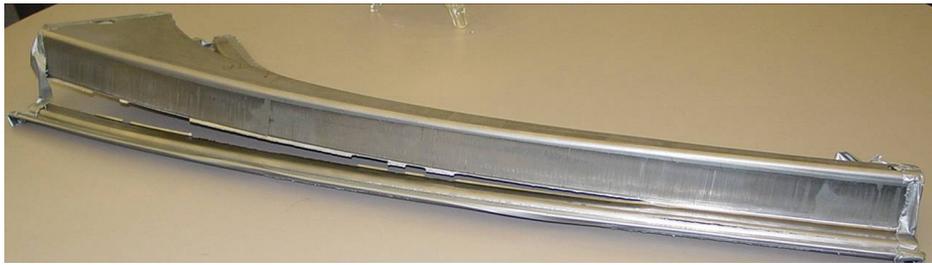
DP800 stamping exhibiting shear fracture.
